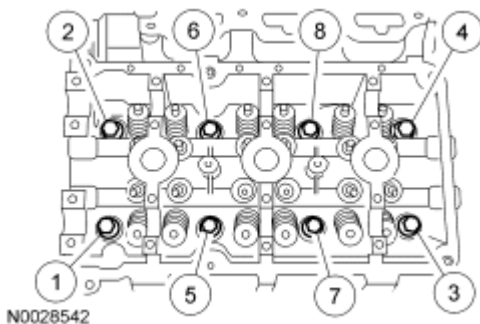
Locating LH & RH Cylinder Heads Bolts In Loosening Sequence
